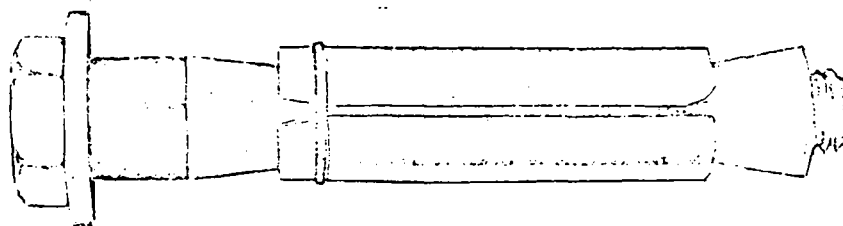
(o) Heavy-duty expansion bolt with hexagon-headed bolt
